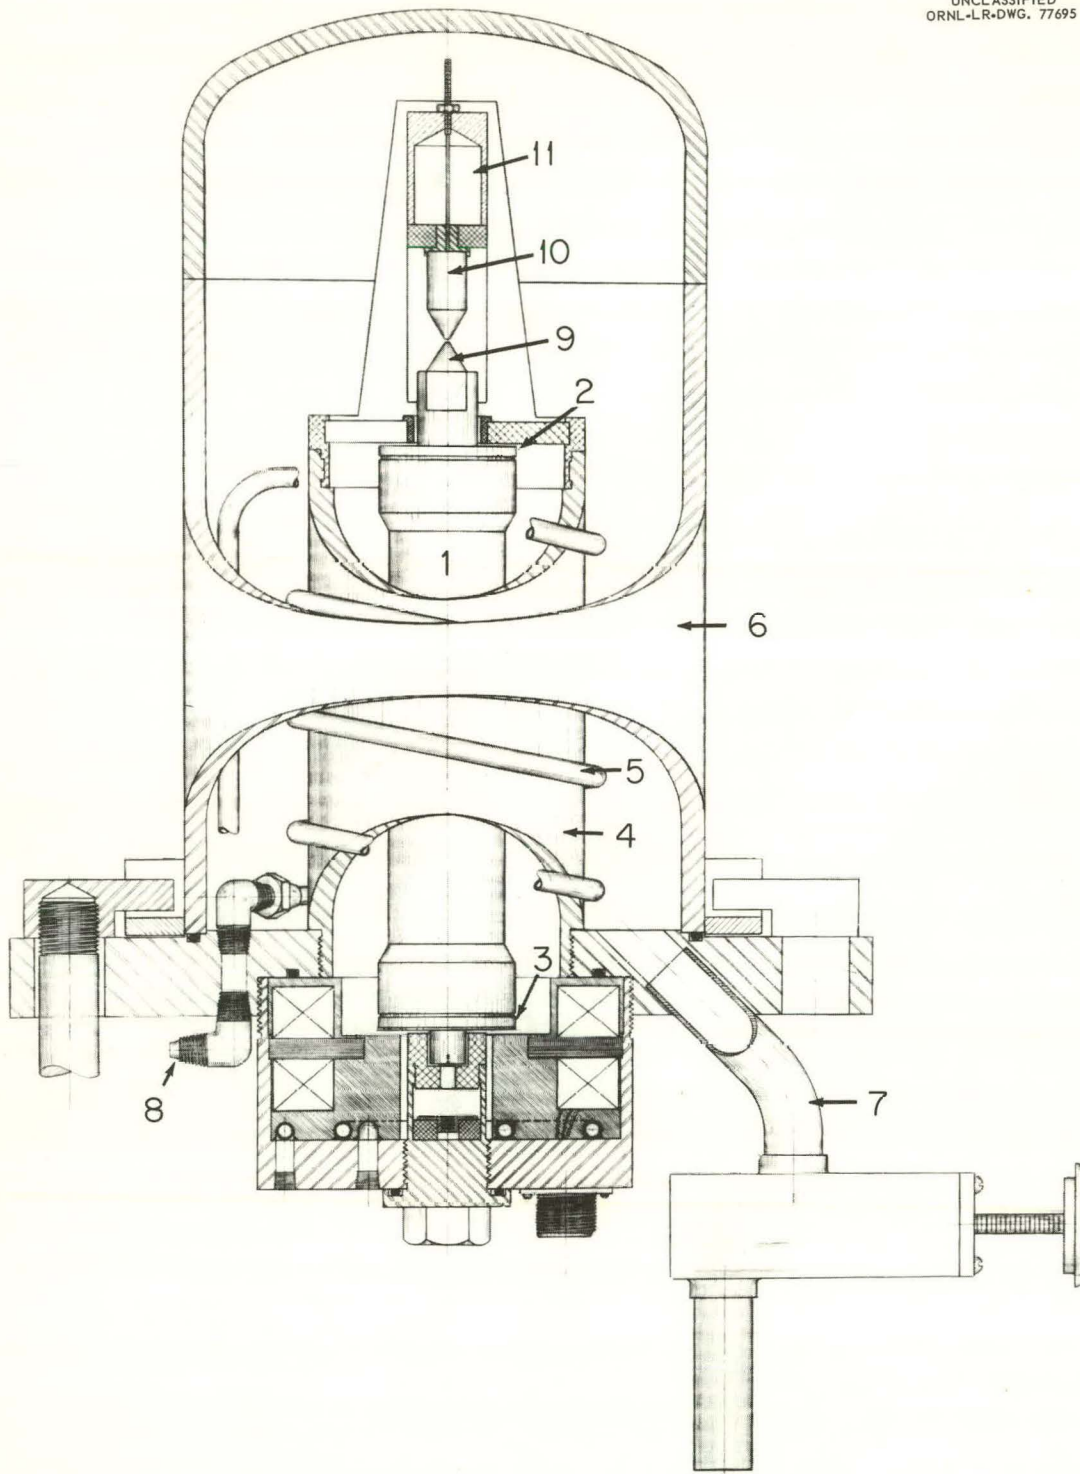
Drive Assembly, Vacuum Chamber, Armor Shield, and Bearing Systems for Rotor C-II. (1) Rotor body; (2) upper end cap; (3) lower end cap; (4) cooling jacket; (5) cooling coil; (6) vacuum jacket; (7) vacuum line; (8) coolant inlet; (9) upper magnetic bearing, rotating member; (10) upper magnetic bearing, stationary member; (11) upper bearing suspension.
